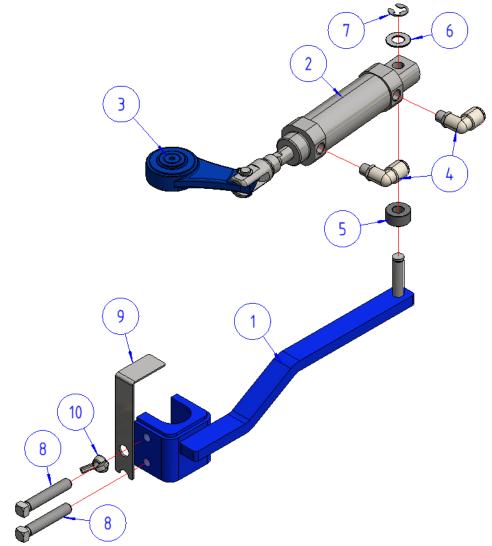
HSA48 – Valve Mount Arm, Chlorine Drum
